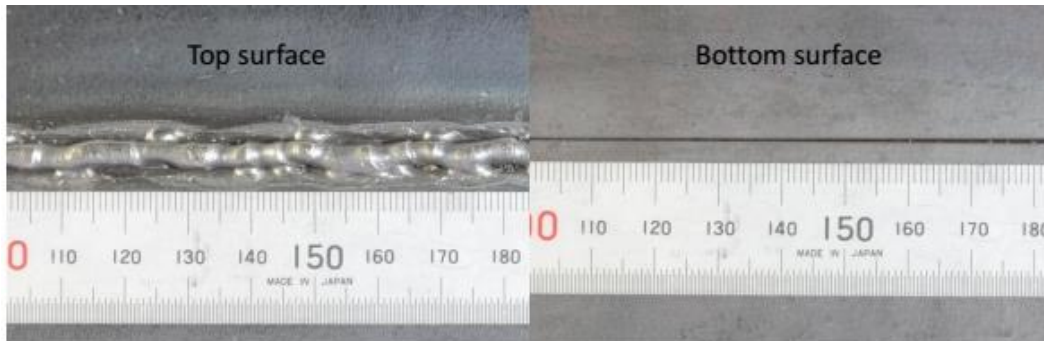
The bead appearance of MIG welding (Welding current: 105 A; welding voltage: 21V; wire feed rate: 240 cm/min; welding speed: 12 cm/min)
